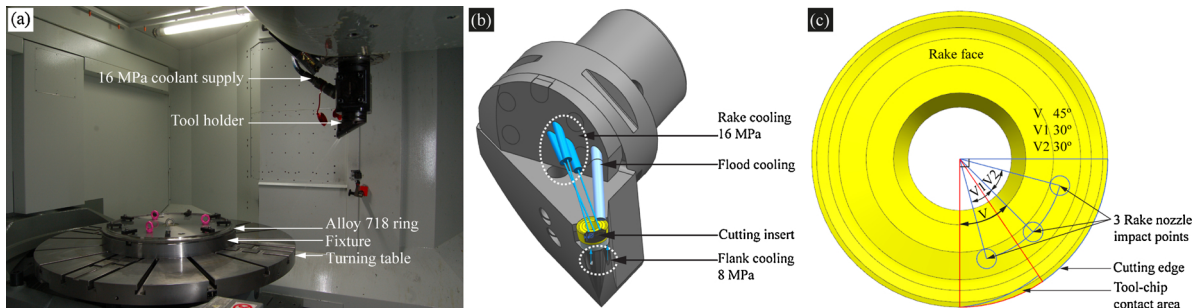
(a) Experimental setup of 5 axis machine; (b) Special designed high-pressure coolant tool holder with three nozzles directed to rake and two nozzles to flank extracted from [14]; (c) Impact points of three nozzles on the rake face.
